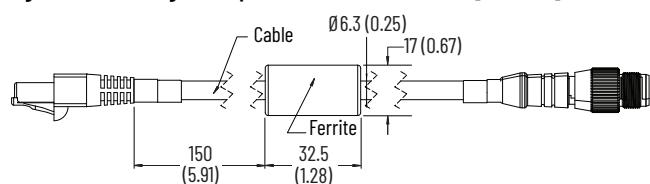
M12 Plug/M12 8-pin Socket (Shielded Cable) Extension Patchcord [mm (in.)] (b)
